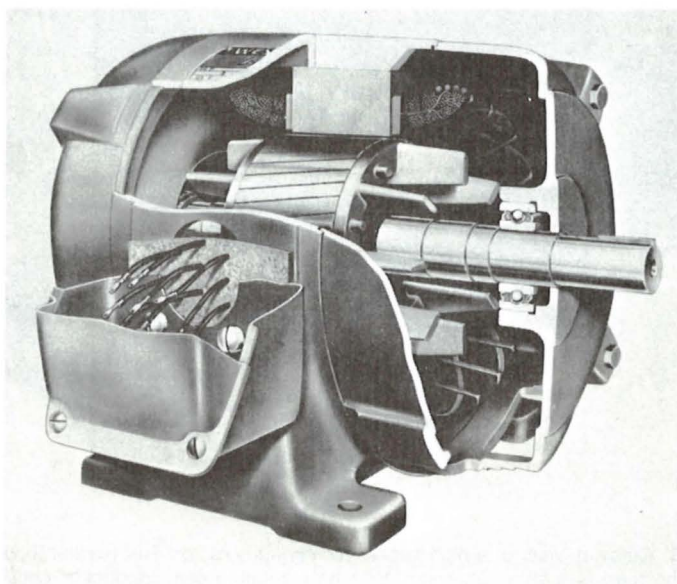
Cutaway view of a squirrel-cage induction motor. (Westinghouse Electric Corporation.)
